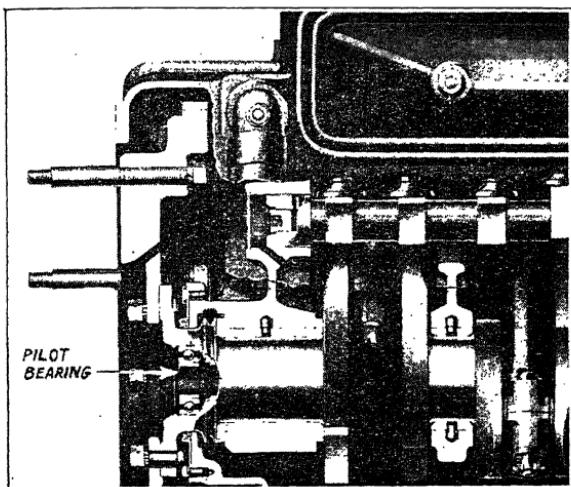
Flywheel Bearing or Clutch Shaft Pilot Bearing
